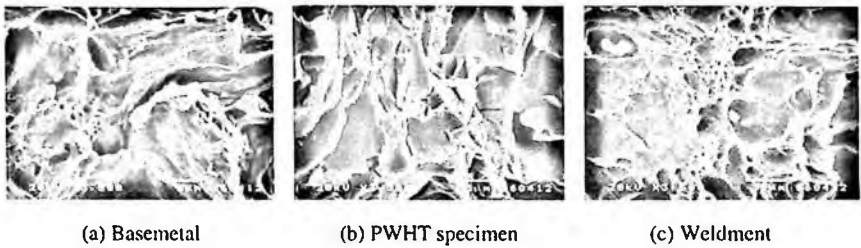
SEM photos for the basemetal, PWHT specimen and weldment on the fractured surfaces.
